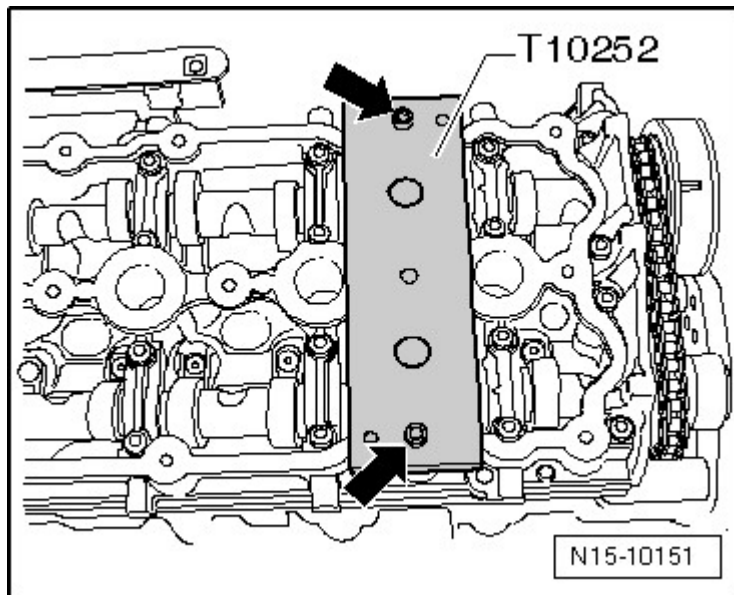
Identifying Camshafts Secured Using Camshaft Locator T10252
